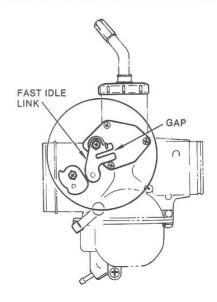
Checking fast idle link-to-cam clearance (Sec 11)
